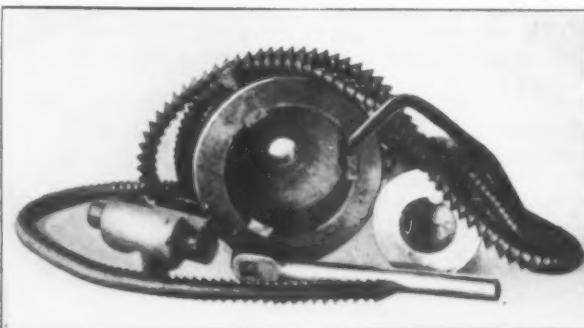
Parts Used in Boring the Front End of the Reamer Shells.
